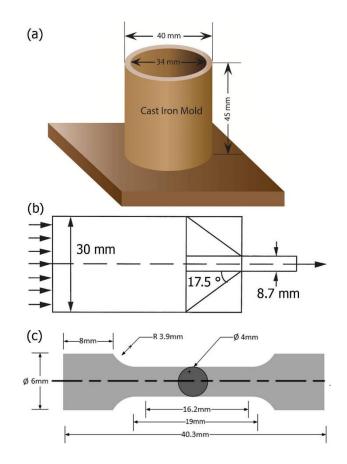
Details of (a) metallic mold (b) extrusion die, and (c) tensile specimen.
